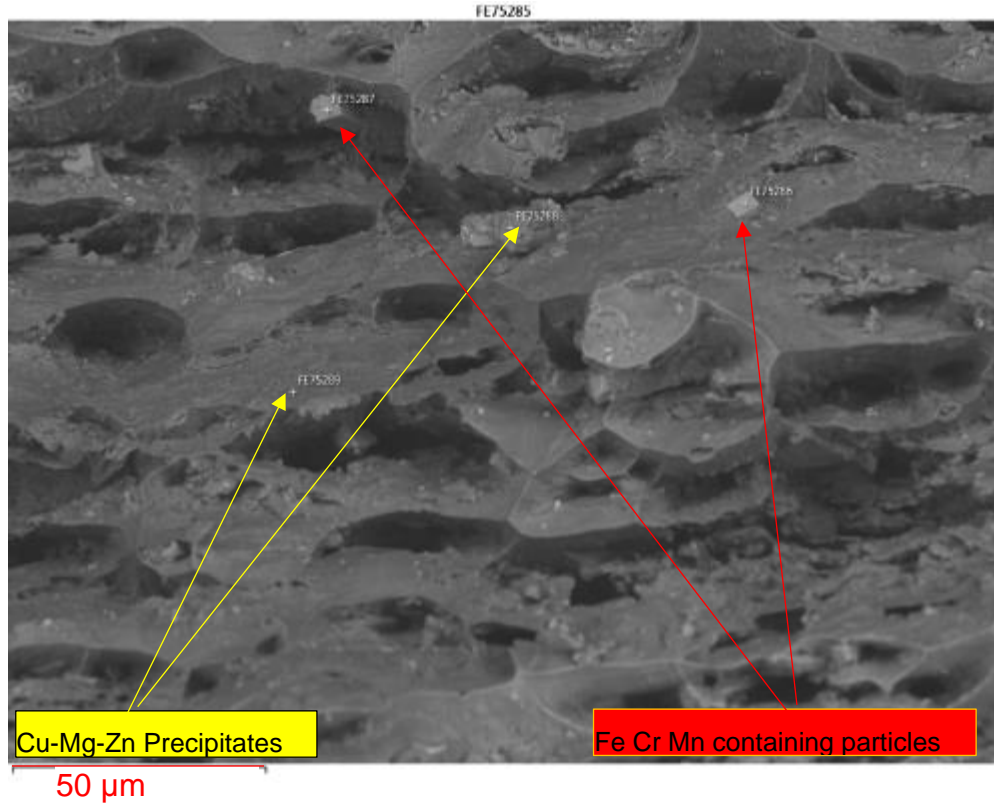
High mag SEM image of fractured surface of equi-biaxial bulge specimen of HRC7075 sheet.
